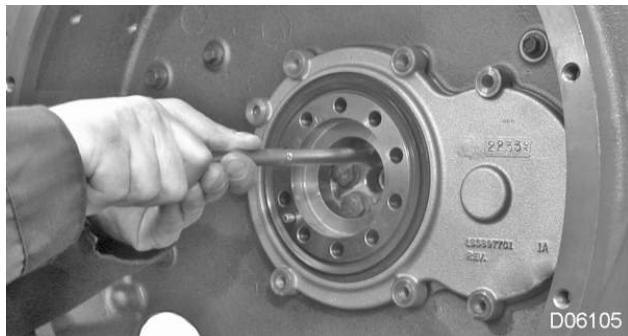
Use Heel Bar to Loosen Secondary Flange Gear
